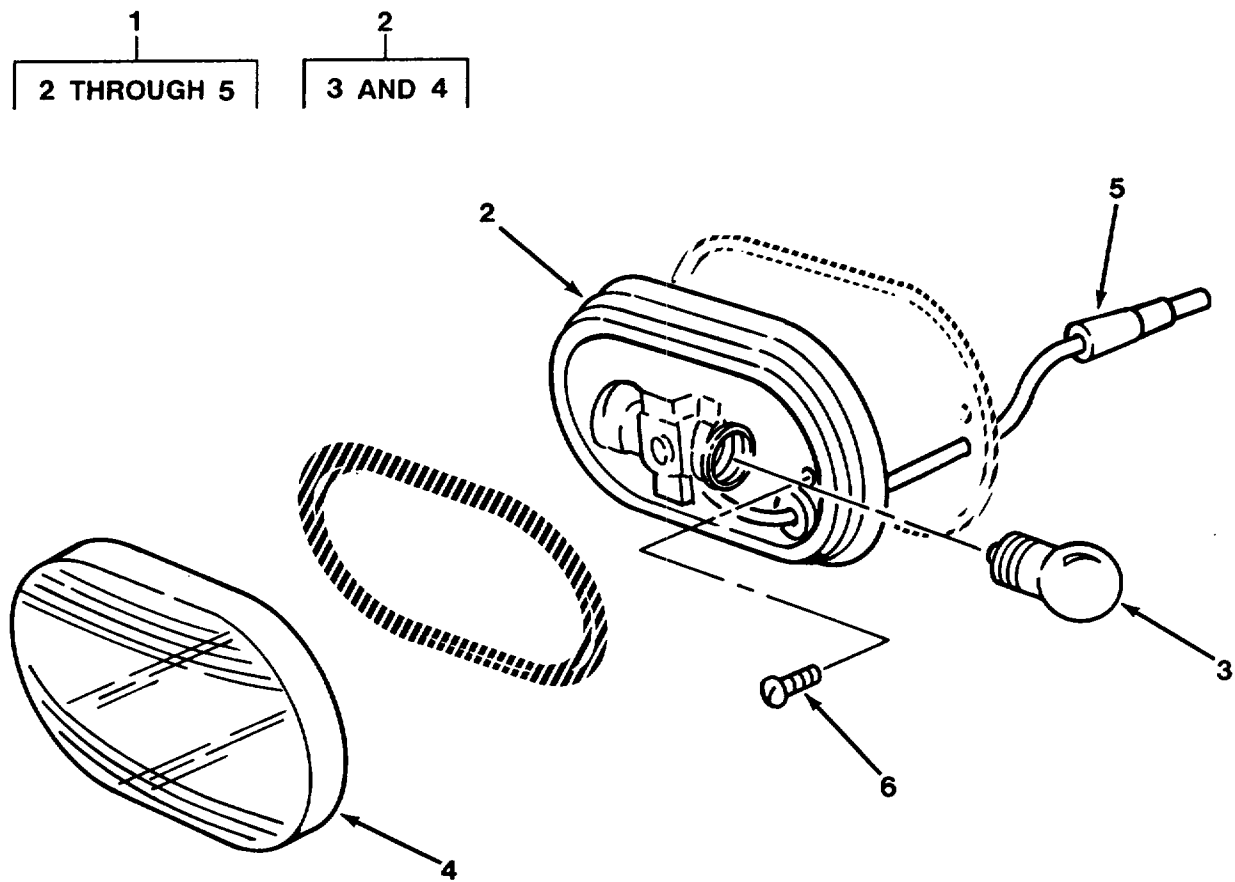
AMBER AND RED CLEARANCE LIGHTS
